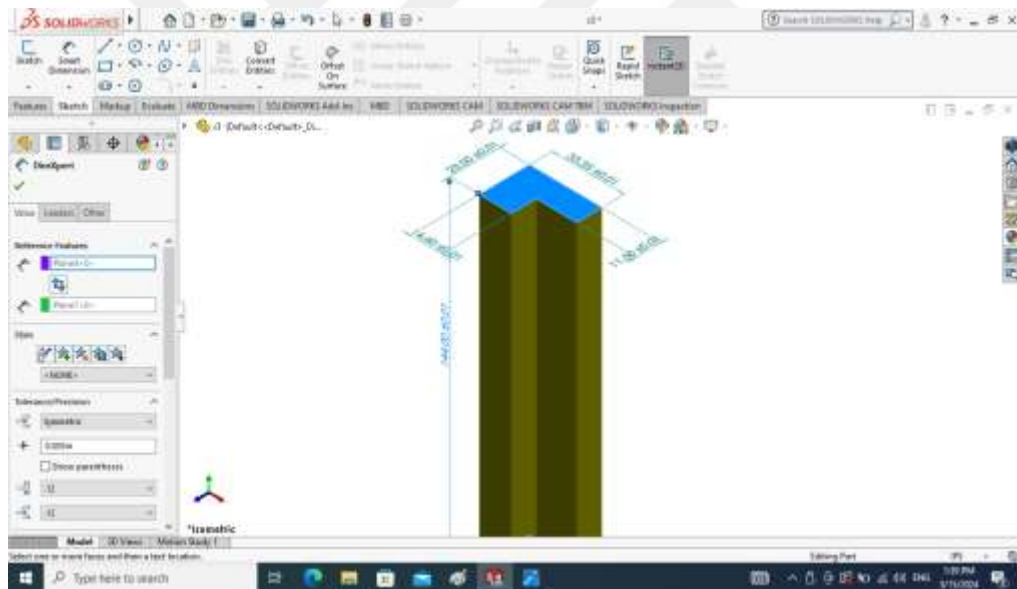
The Dimensions of The Third Case Using SolidWork.
